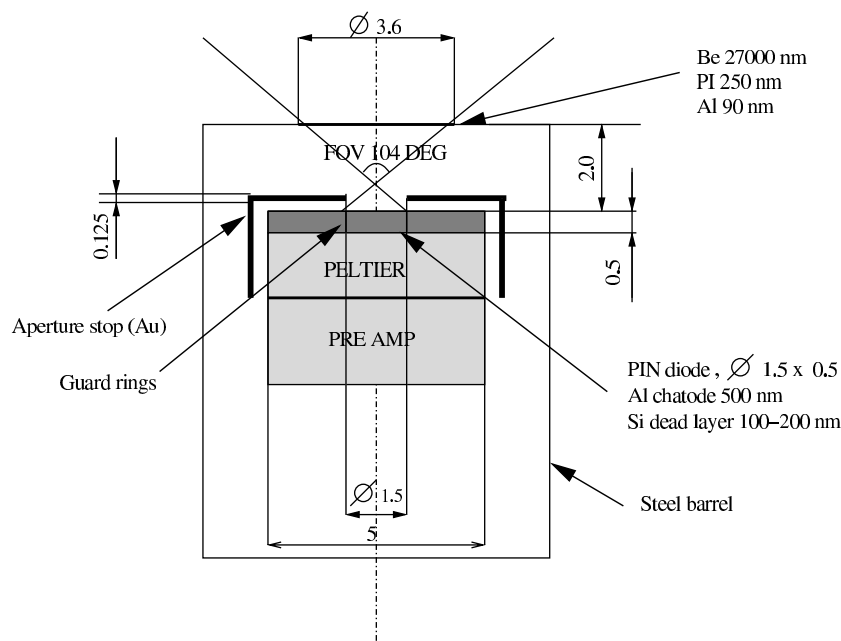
Schematic layout of the XSM PIN enclosure and its dimensions.
